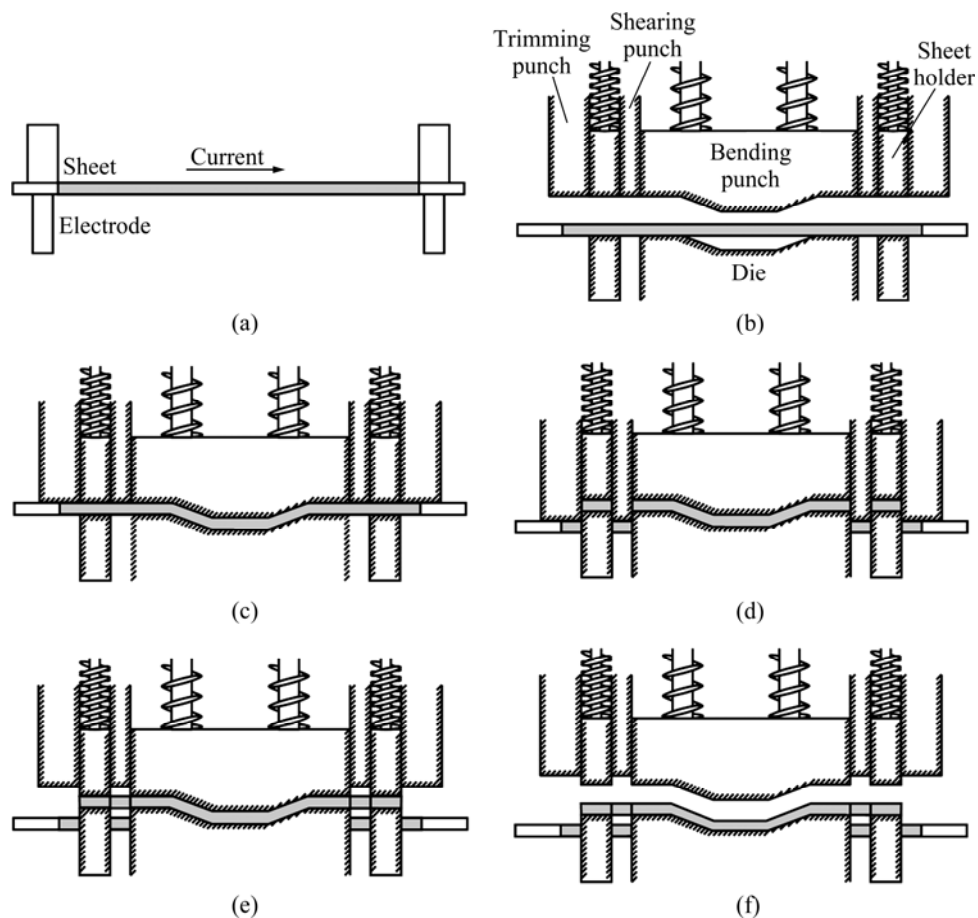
One shot hot stamping process of ultra-high strength steel parts consisting of rapid resistance heating, forming, shearing and die quenching: (a) Resistance heating; (b) Setting; (c) Bending; (d) Shearing; (e) Die quenching; (f) End
